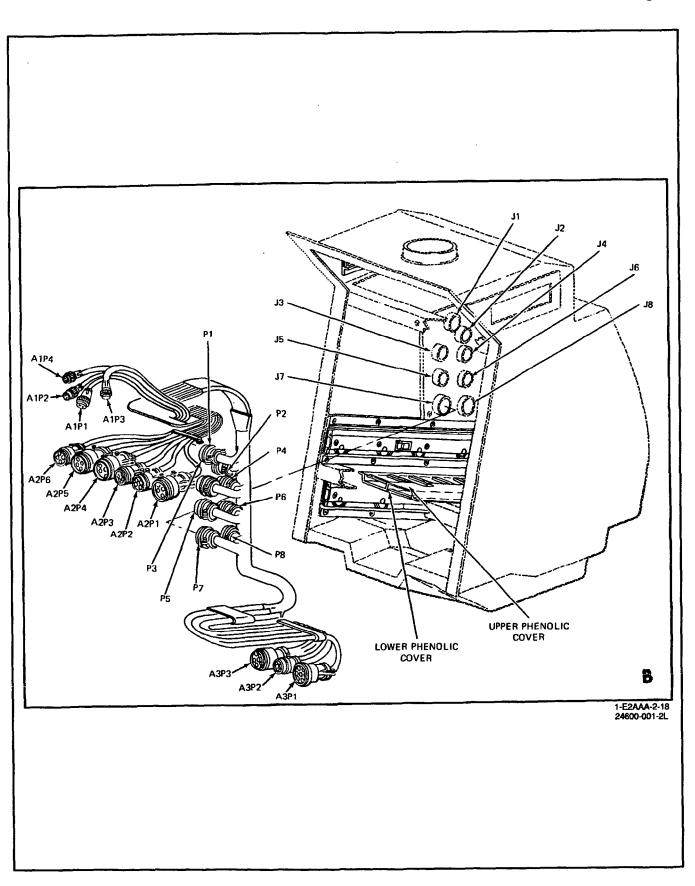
Removal and Installation of Cable Assembly Set OD-48/APA-172 (Sheet 1 of 2)
